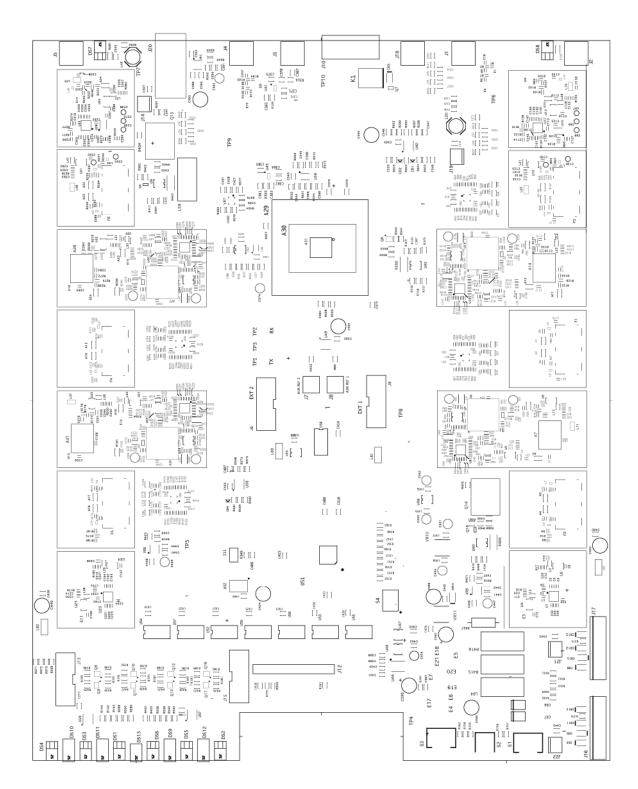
2083-0312-30036 Mechanical Assembly
